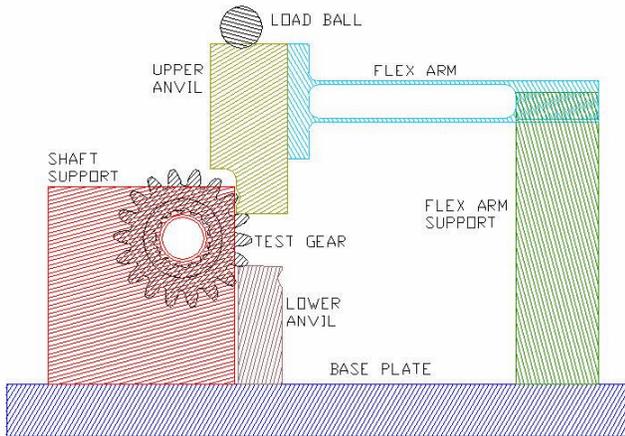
Schematic of Single Tooth Bending Fatigue Test Set-up
